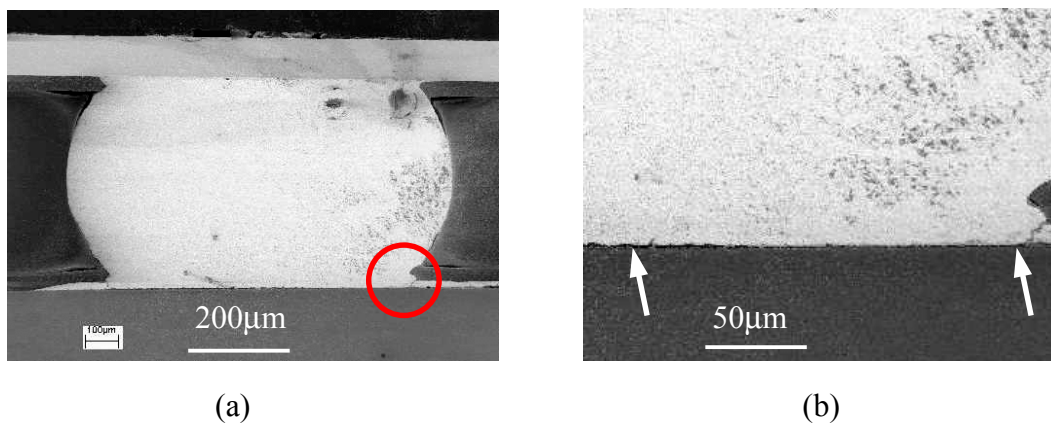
(a) A CCB solder joint that failed (50% up) at 135 cycles; and (b) the zoomed-in view of the circled region.
